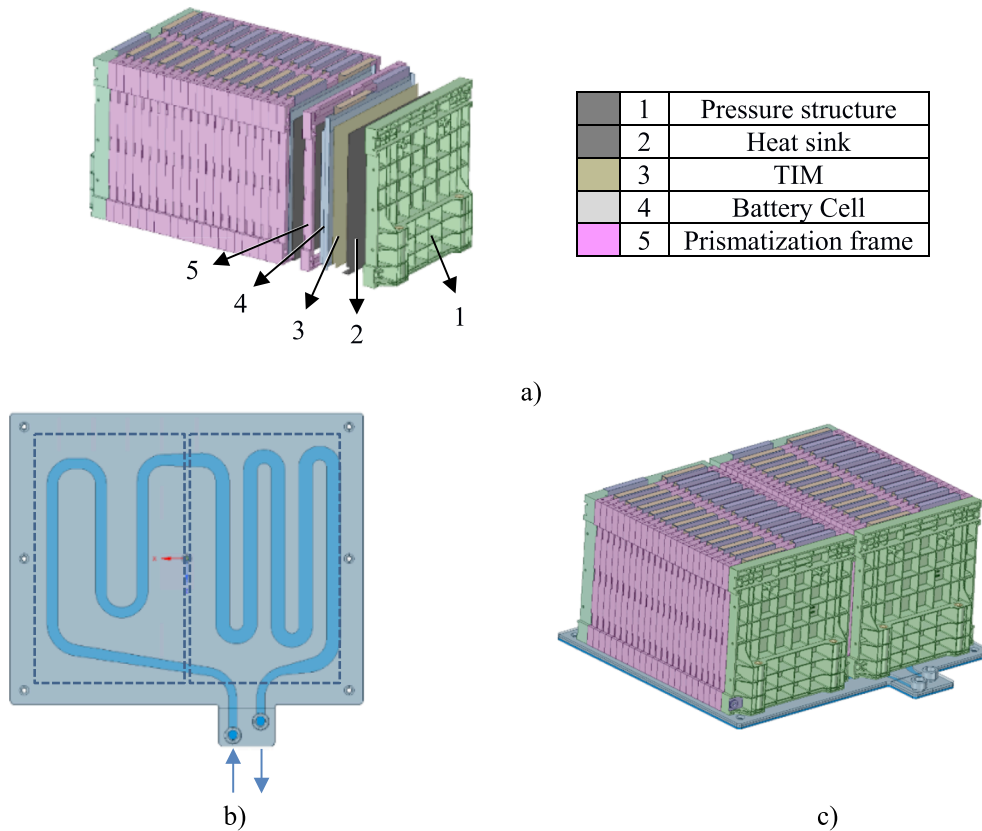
Indirect Liquid Cooling (a) cell to module level scale up defining a framed linear pattern, (b) the reference cold plate hydraulic design and (c) the sub-system level assembly.
